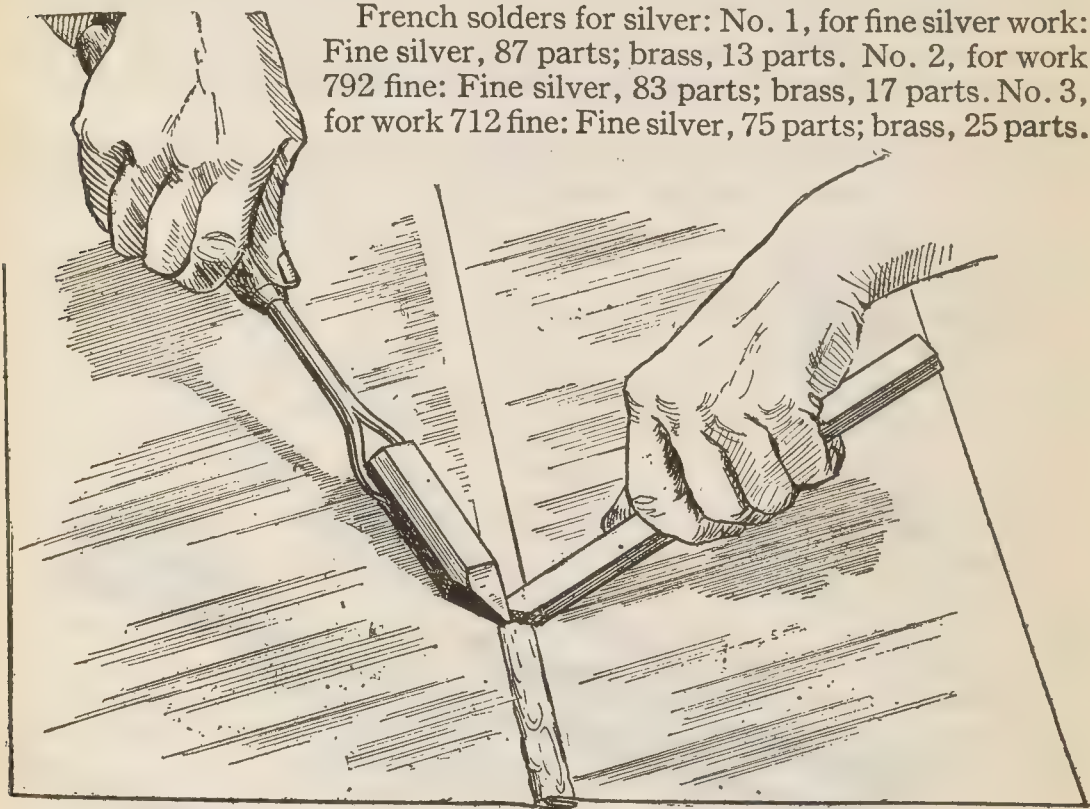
,375.—Ordinary soldering bit and method of using same in soldering a lock seam. All the surfaces which come into contact, in the inside of the seam, must be thoroughly cleaned before the folding is done. When the metal is turned upon one side, as in the case of turned copper, the folds are turned so that the turned surface will face each other. If the copper be without turning, although not strictly necessary to turn the surfaces that will cover inside of the seam. Secure sheets in place and close seams with a mallet. Apply flux and solder as shown. When the metal becomes hot the solder will *sweat* and disappear into the seam. The bit should always be kept sufficiently hot to cause the solder to disappear into the seam.
